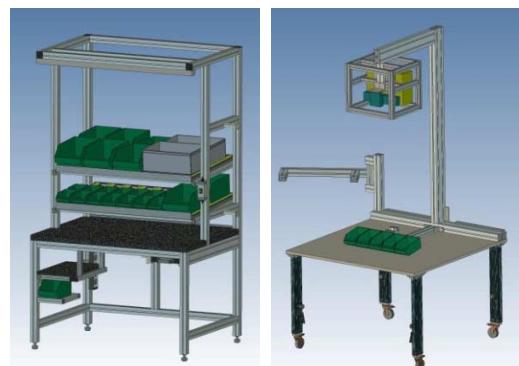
A regular assembly table (left) and the assembly table constructed for ASED (right)
